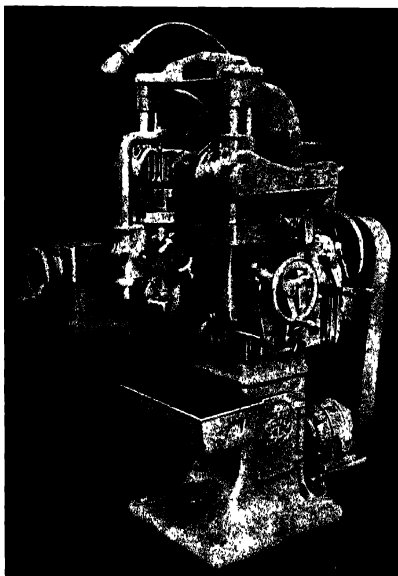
Illustration of Thiel punch-shaping machine. (By permission of E. H. Jones (Machine Tools), Ltd., London.)
